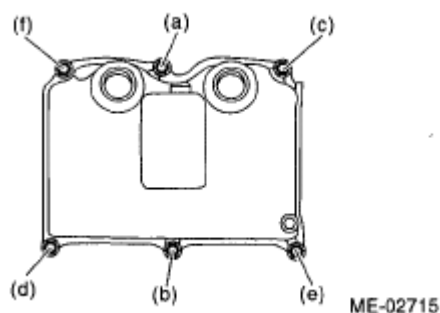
Tightening Sequence Of Rocker Cover Bolts - RH Side
